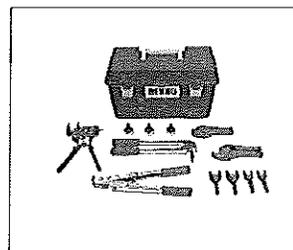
EVERLOC deluxe tool kit for installations of EVERLOC fittings 1/2, 3/4 and 1 in.
